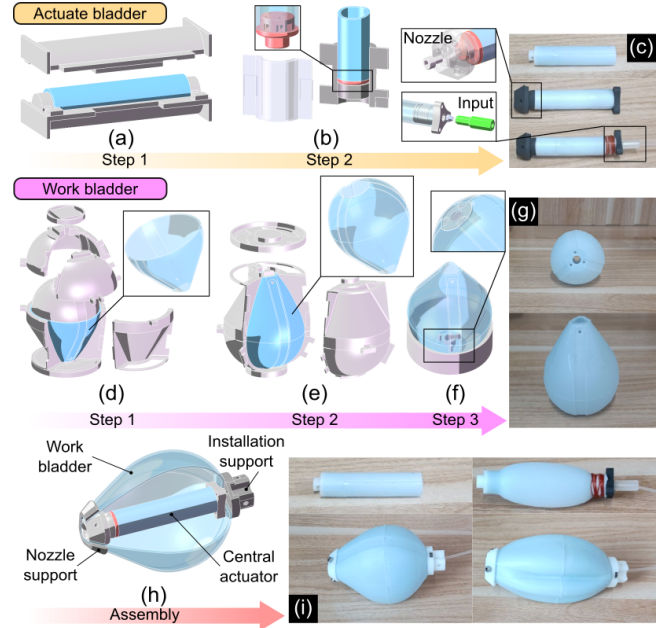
Fabrication steps of the jet unit. Actuate bladder: a) molding process of the main body, b) sealed connection process, and c) real products; Work bladder: d-e) molding process of the main body, f) bottom sealing process, and its g) Real products; h) assembly model of JU; i) working condition of JU.
